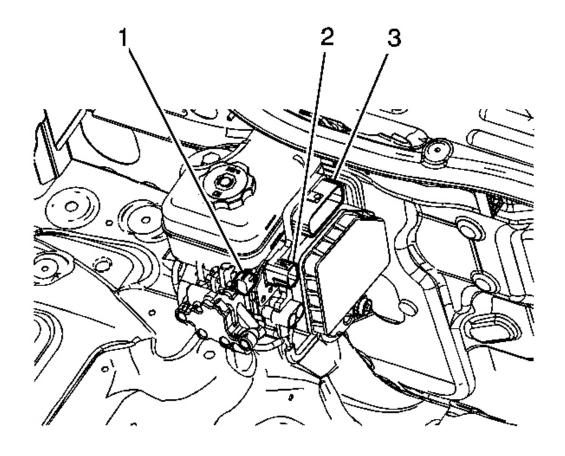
Identifying Brake Fluid Level Sensor Courtesy of GENERAL MOTORS CORP.
